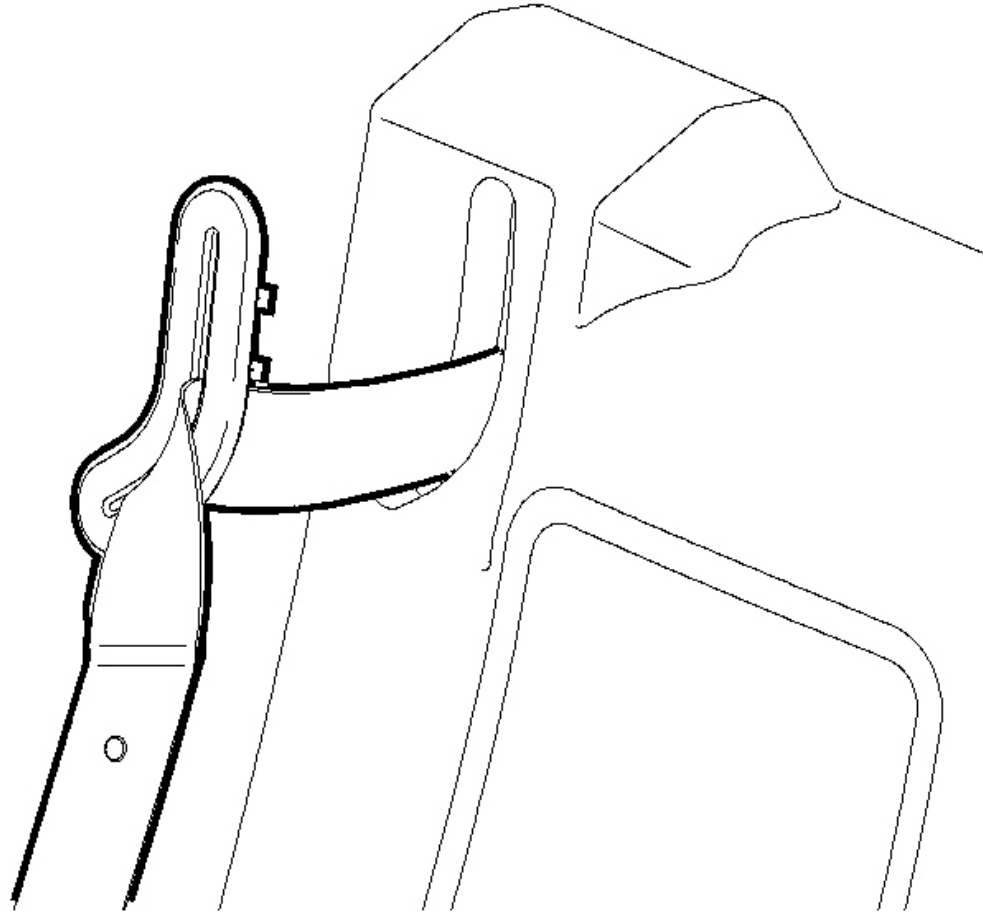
Identifying Shoulder Belt & Escutcheon Through Rear Seat Back Cover
